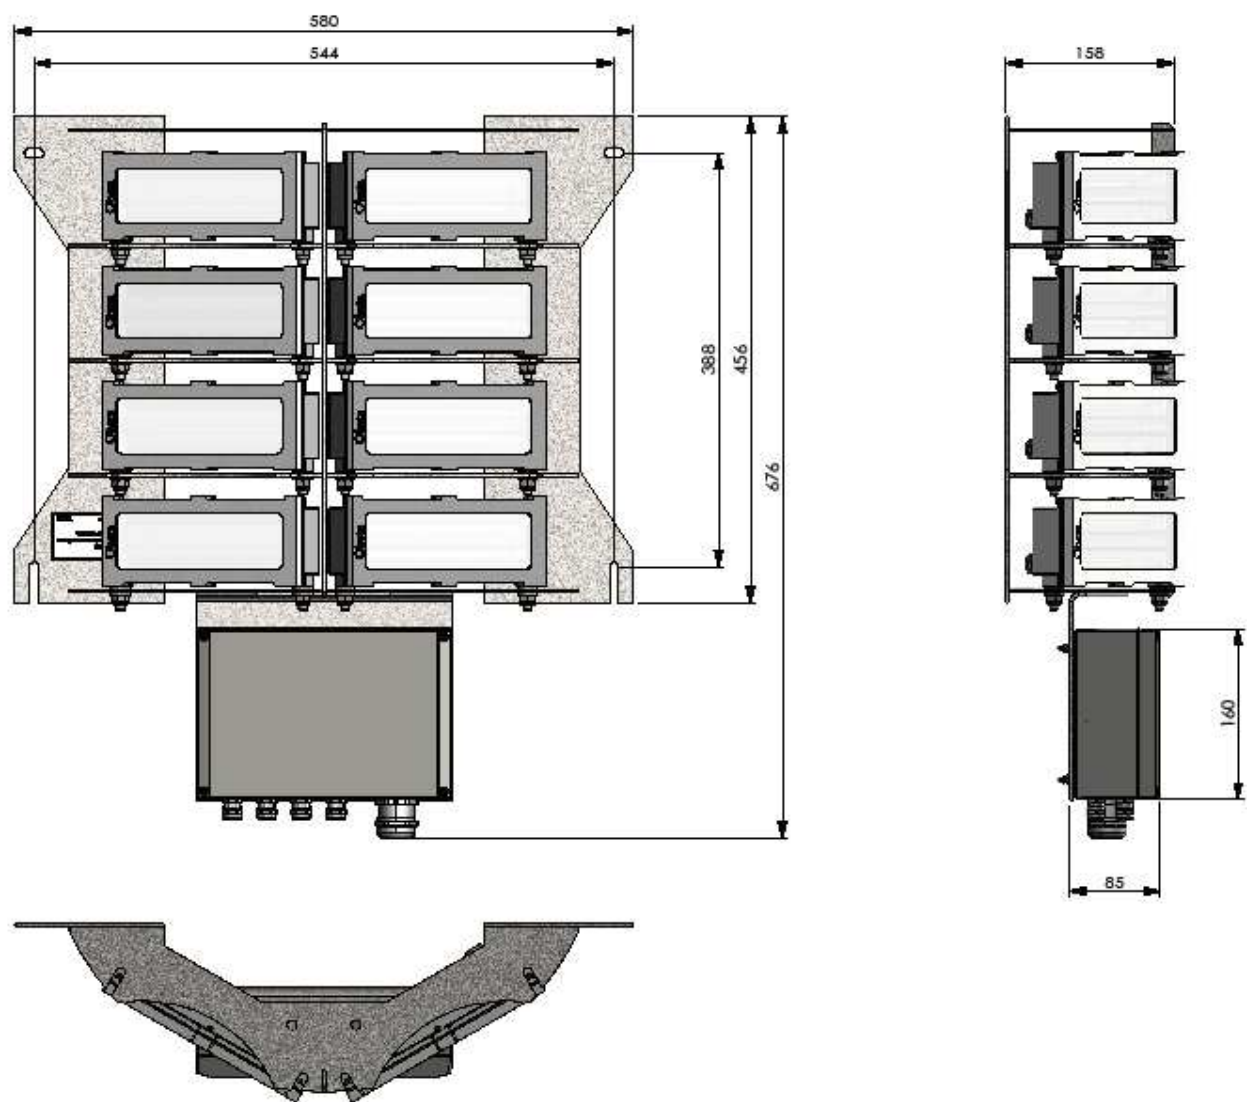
Outline and mounting dimensions OBSTAFLASH HI flashhead
